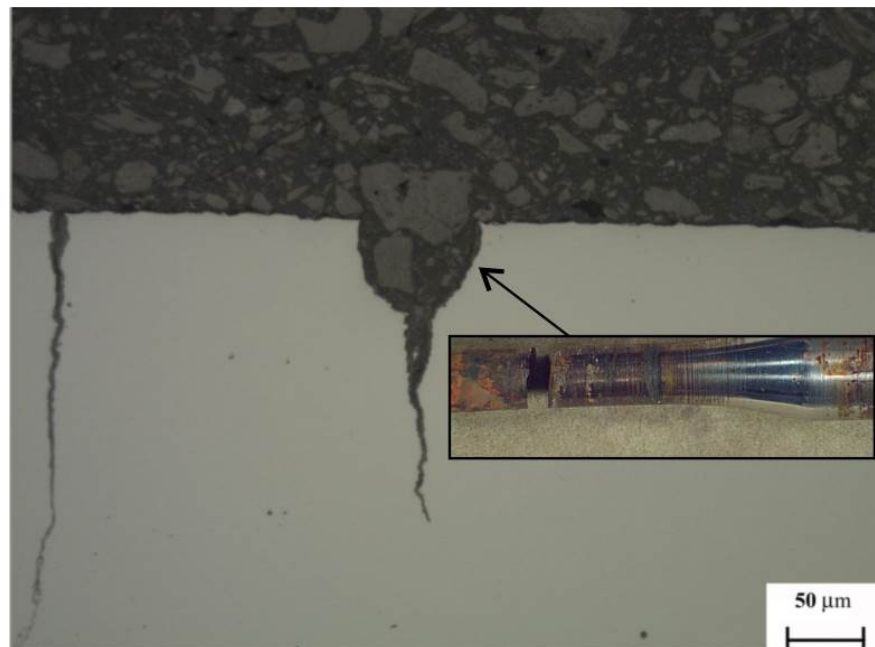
Corrosion pitting and cracking of 4330 continuous radius fatigue specimen
